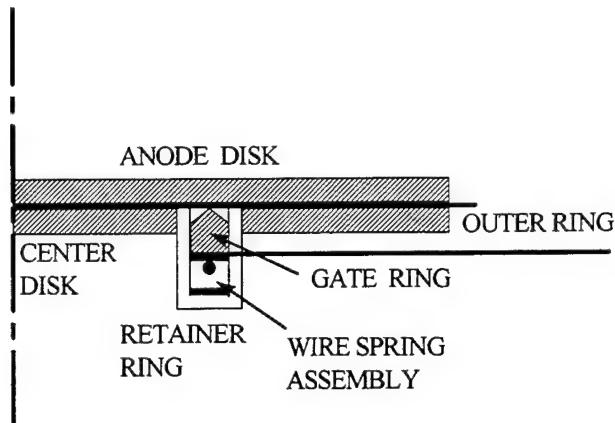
Cross-sectional View of the Molybdenum Parts and the Hatched Areas.
